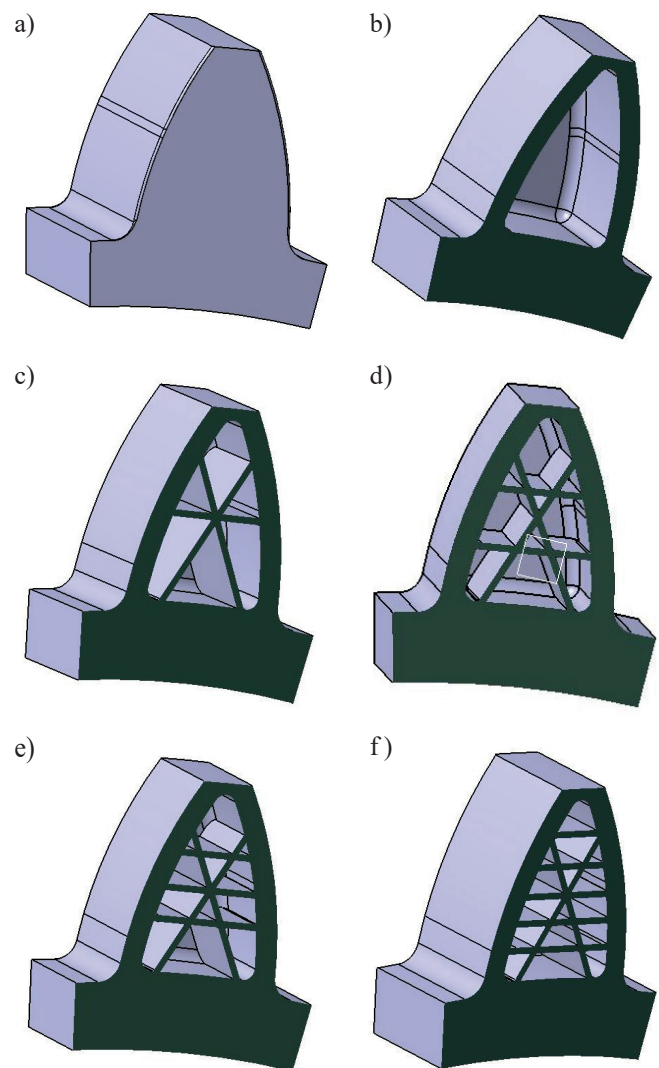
Full body spur gear tooth (100% infill) (a), shell body spur gear tooth without infill structure (b), with triangular infill structure inside with 20% infill (c), 40% infill (d), 60% infill (e) and 80% infill (d) (shown with a section view)
